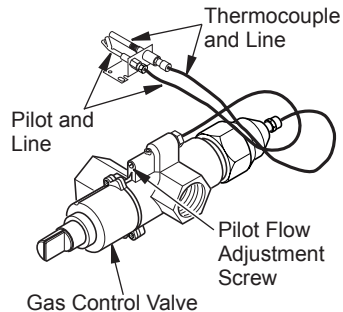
Gas Control Valve with Thermocouple and Pilot
